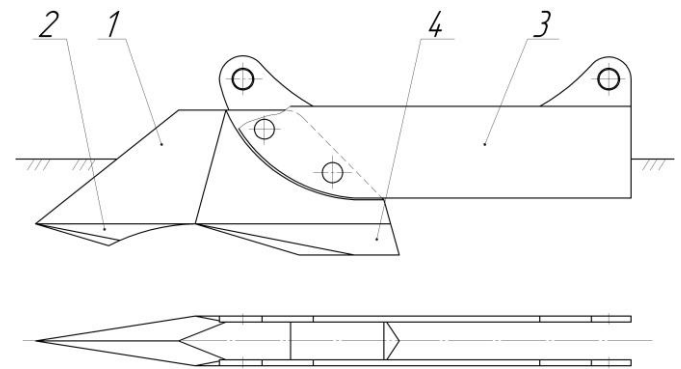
Precision seed drill coulter with improved coulter: 1 - upper part of wedge furrow; 2 - lower part of furrow opener; 3 - sidewalls; 4 - compactor
